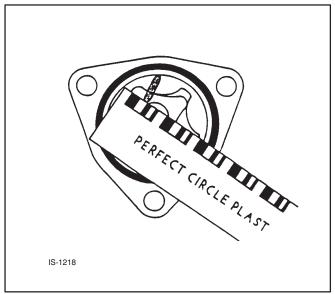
MEASURING ROTOR TO COVER CLEARANCE
